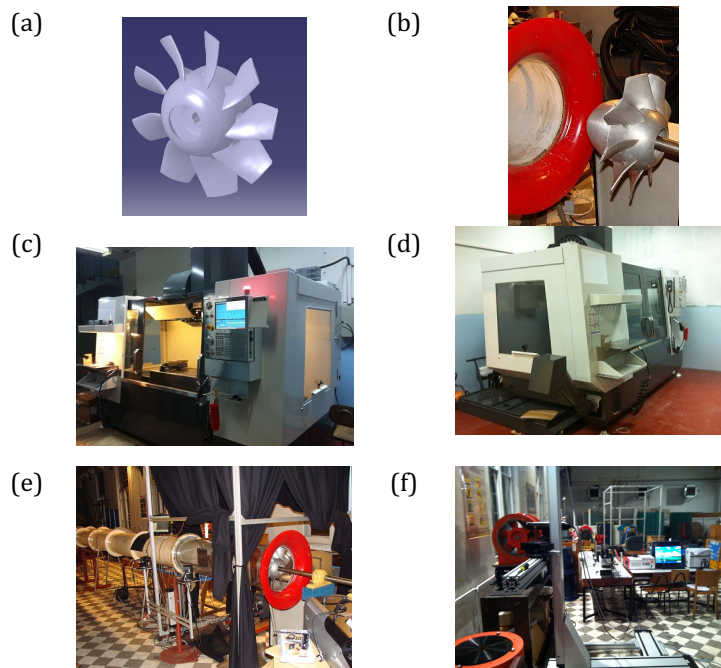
(a) CAD model of the axial fan impeller; (b) Axial fan impeller. [2] (c-d) CNC machines at the UB FME: (c) 4-axis; (d) 5-axis. e-f) Test rigs with new experimental equipment at the UB FME: (e) Stereo PIV system; (f) LDA system.
